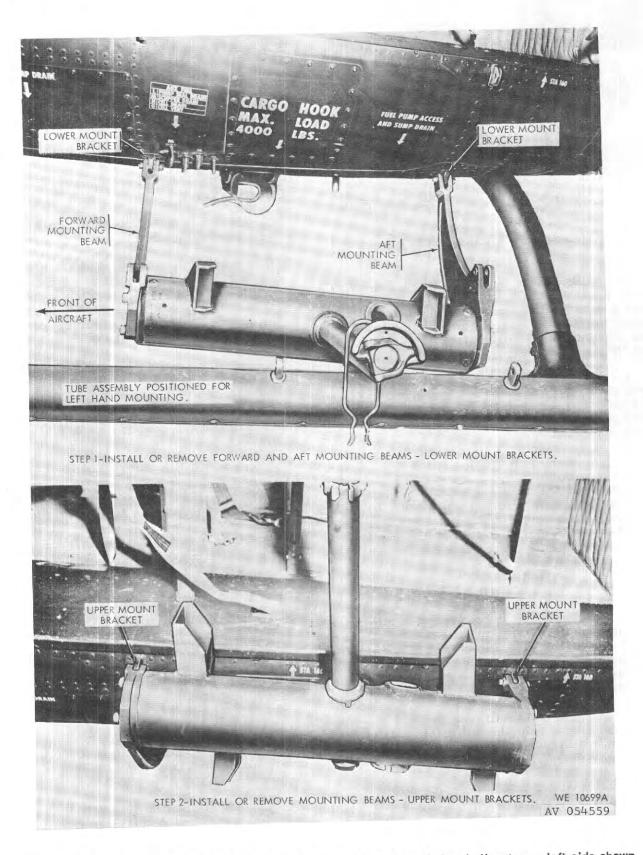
Armament subsystem M23 mount assembly - installed on helicopter - left side shown
